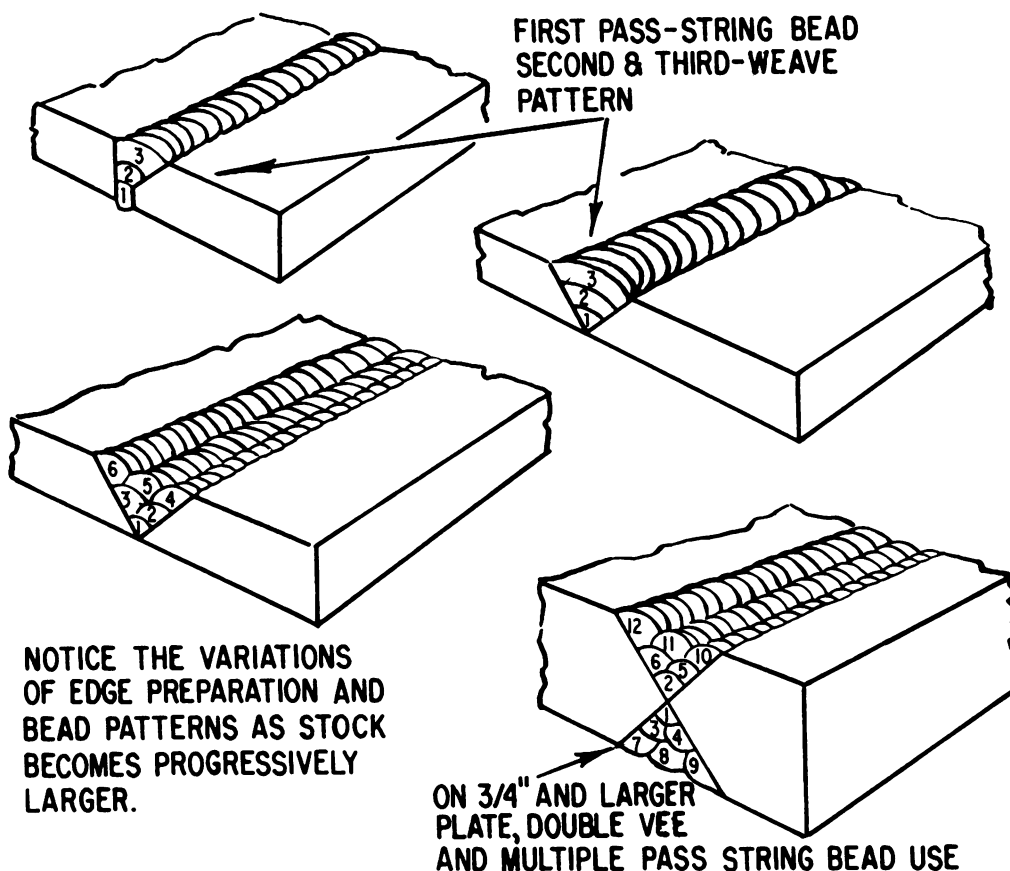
Multiple pass groove welding of butt joints.
